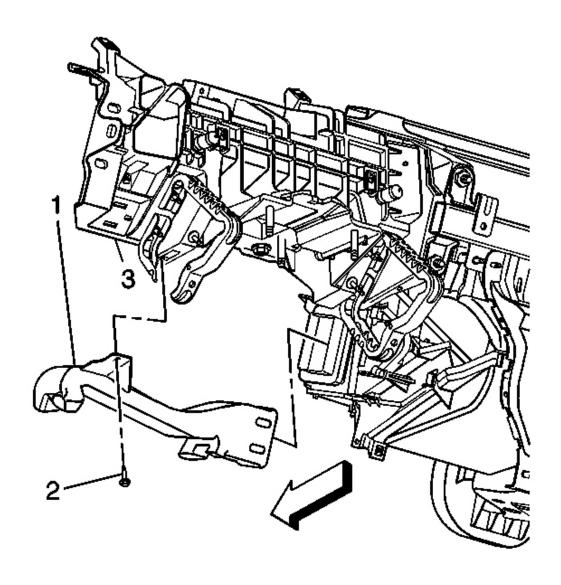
View Of Left Side HVAC Floor Air Outlet Duct Courtesy of GENERAL MOTORS CORP.
